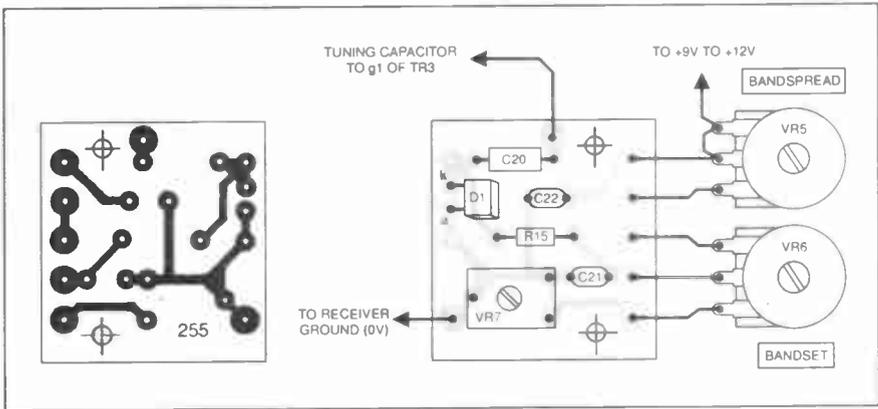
Printed circuit board layout for the electronic tuning system – shown full size.
